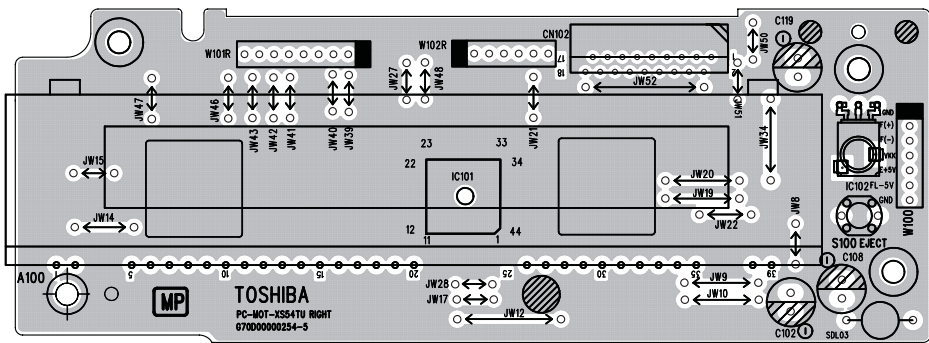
EU03A Front (R) PC Board (Top side)
